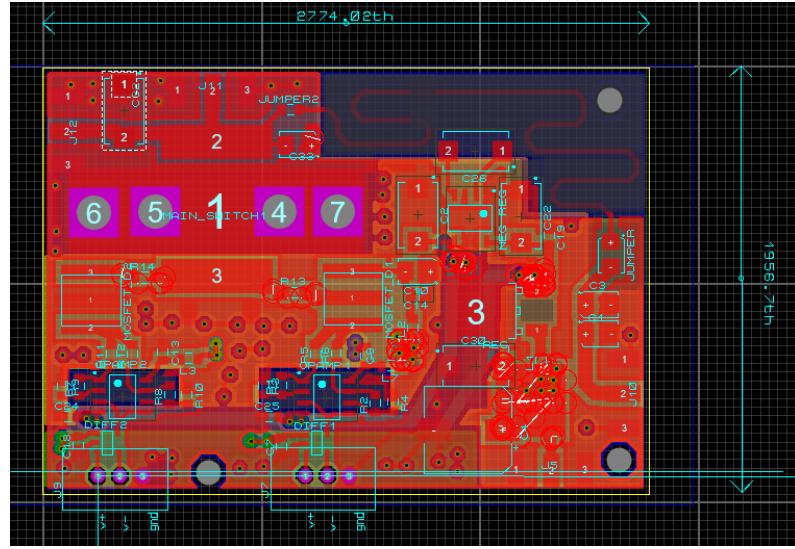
Modified design layout of the amplifier PCB to include the equivalent micro-strip transmission line integrated on board (dimensions: 65 mm by 50 mm)
